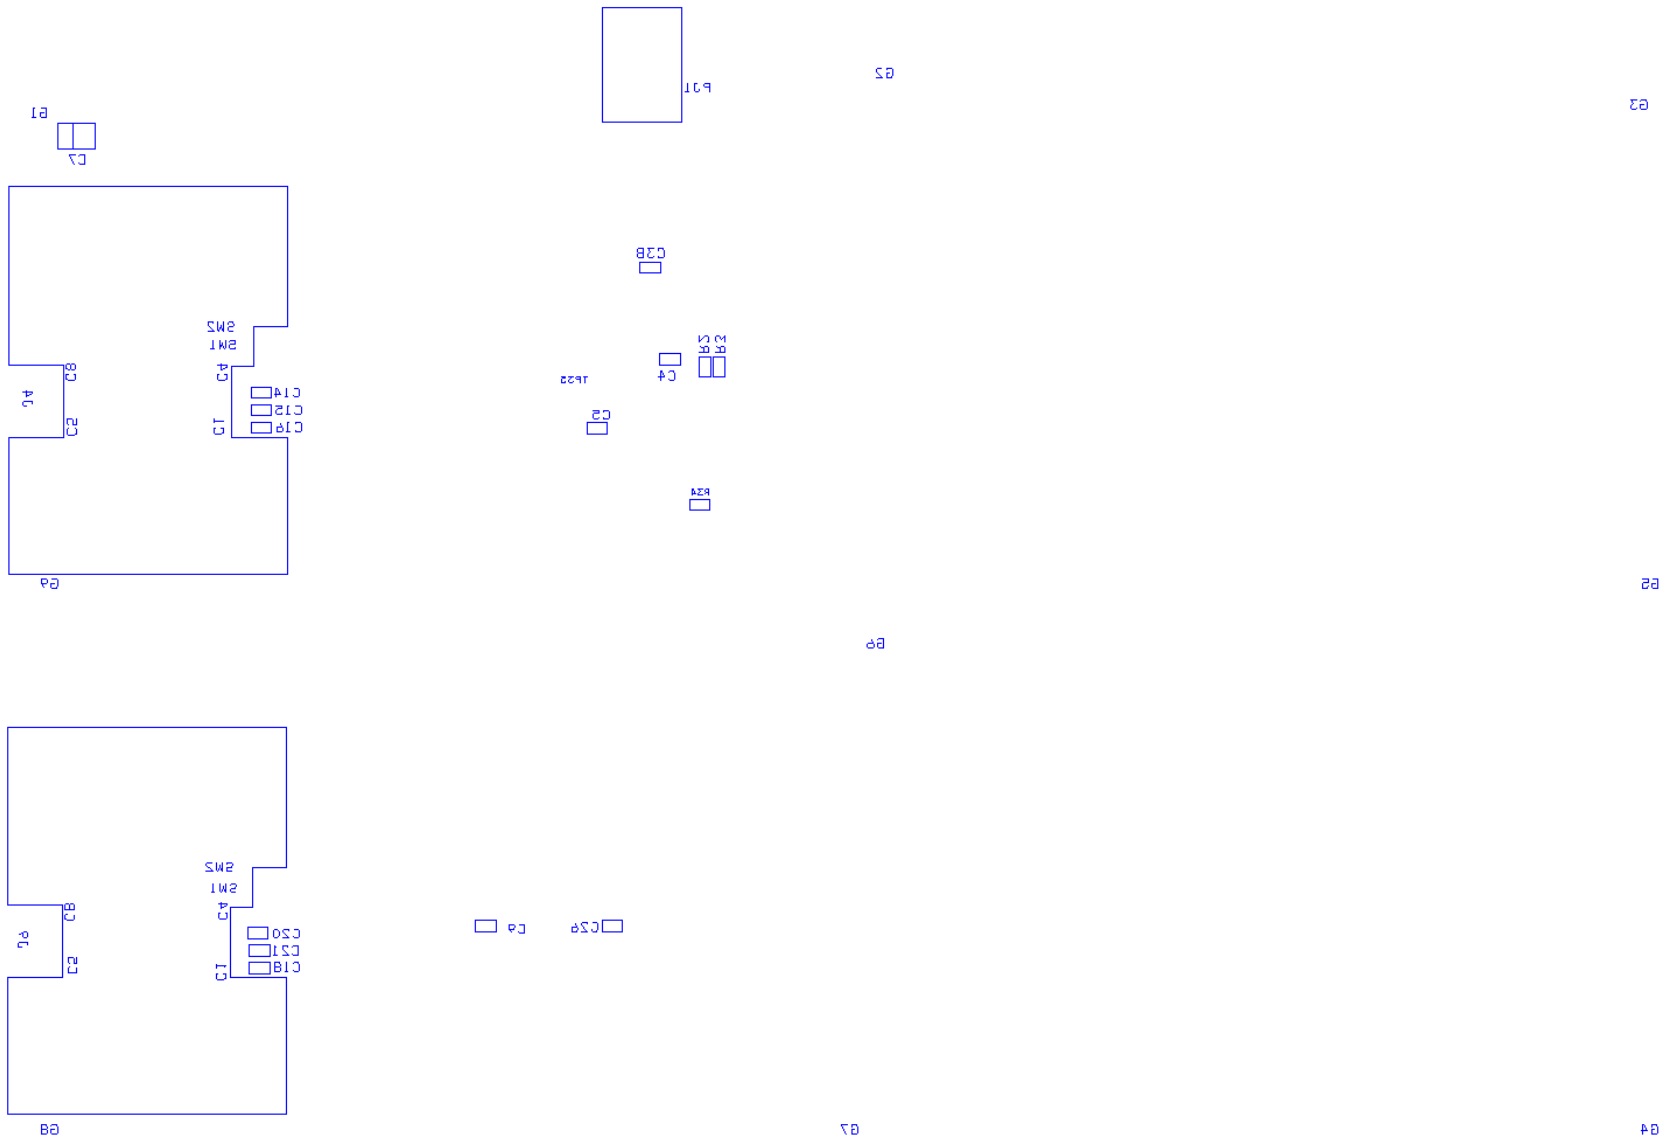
73S1210F Evaluation Board Bottom View (Silkscreen)
